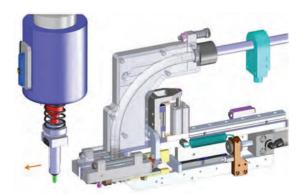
Shuttle Table Moves Driver to Rivet Buck Position
